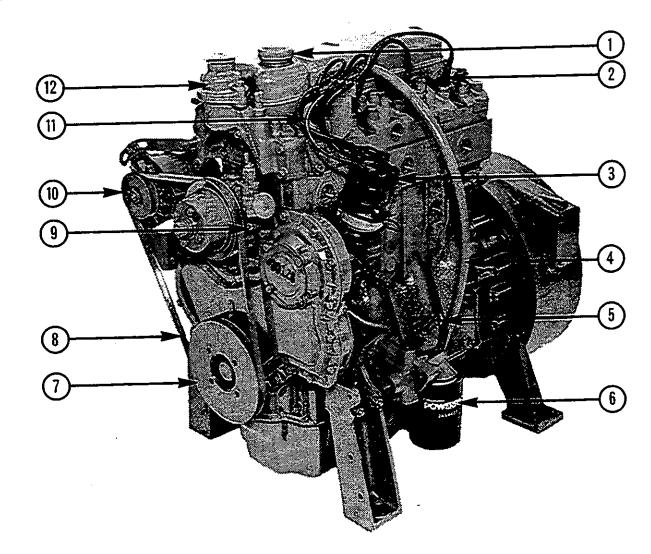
Front/left side of G4.236 gasolene/LPG engine
